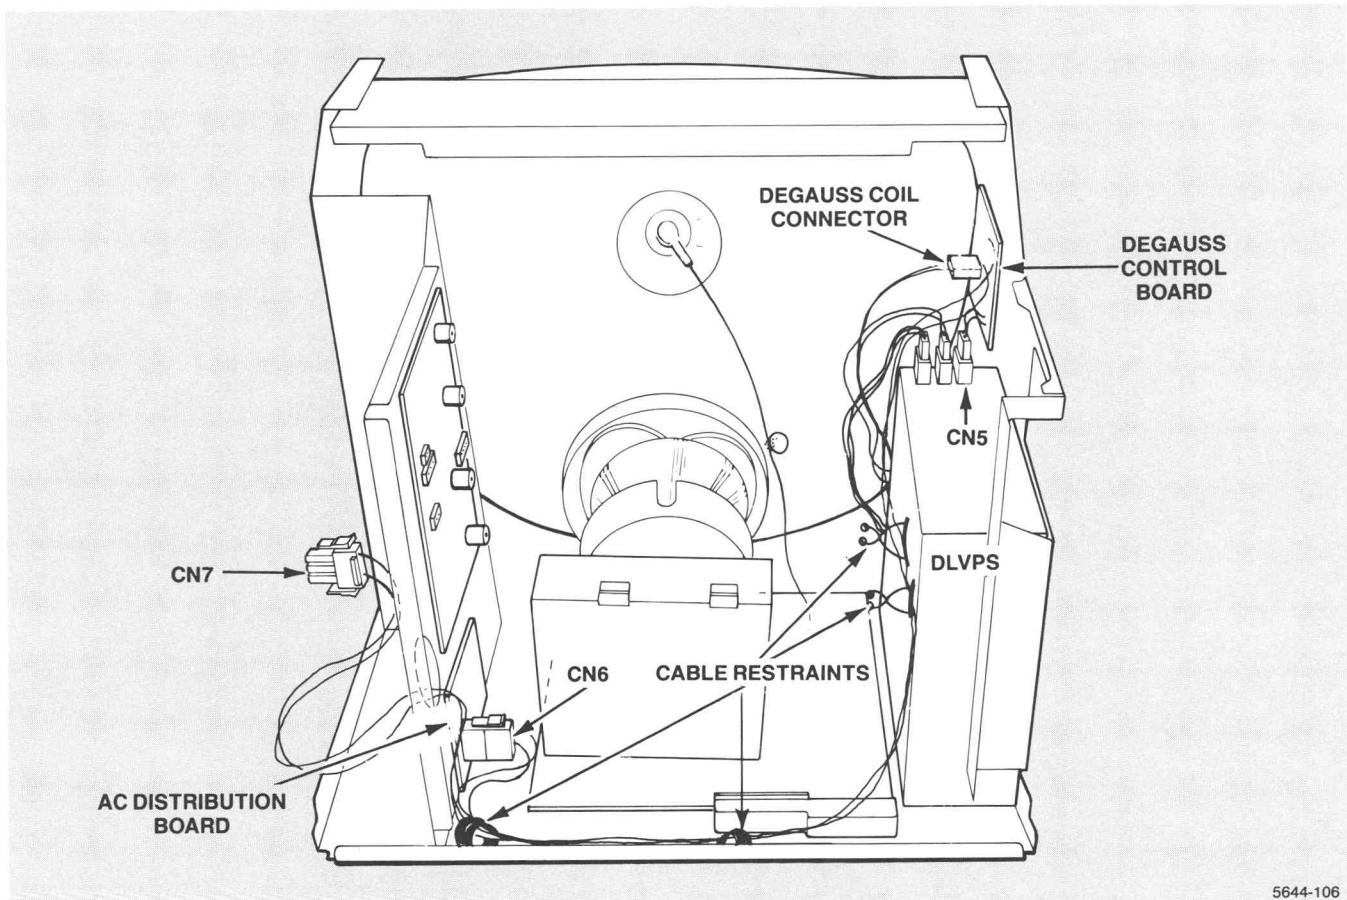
Removing the Degauss Control Board (119-2387-00).
